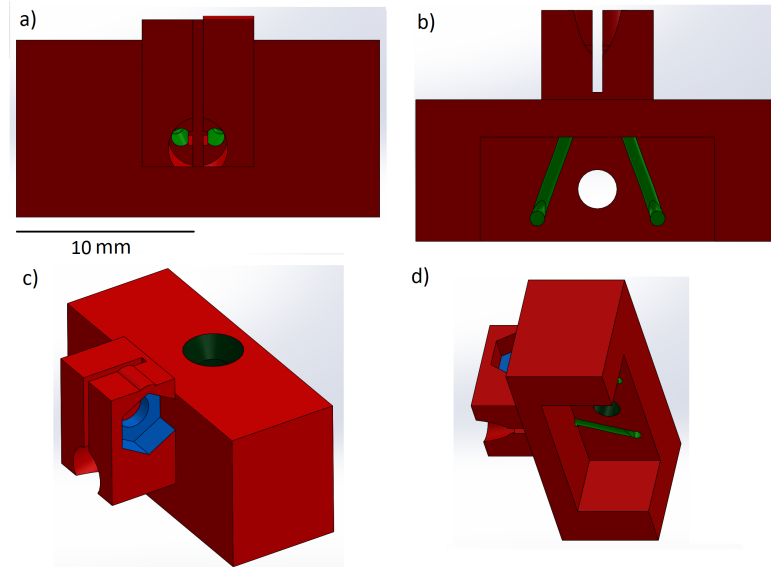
a) Front view of the tuning fork holder. b) Bottom view. c) Up side view d) Bottom side view.
